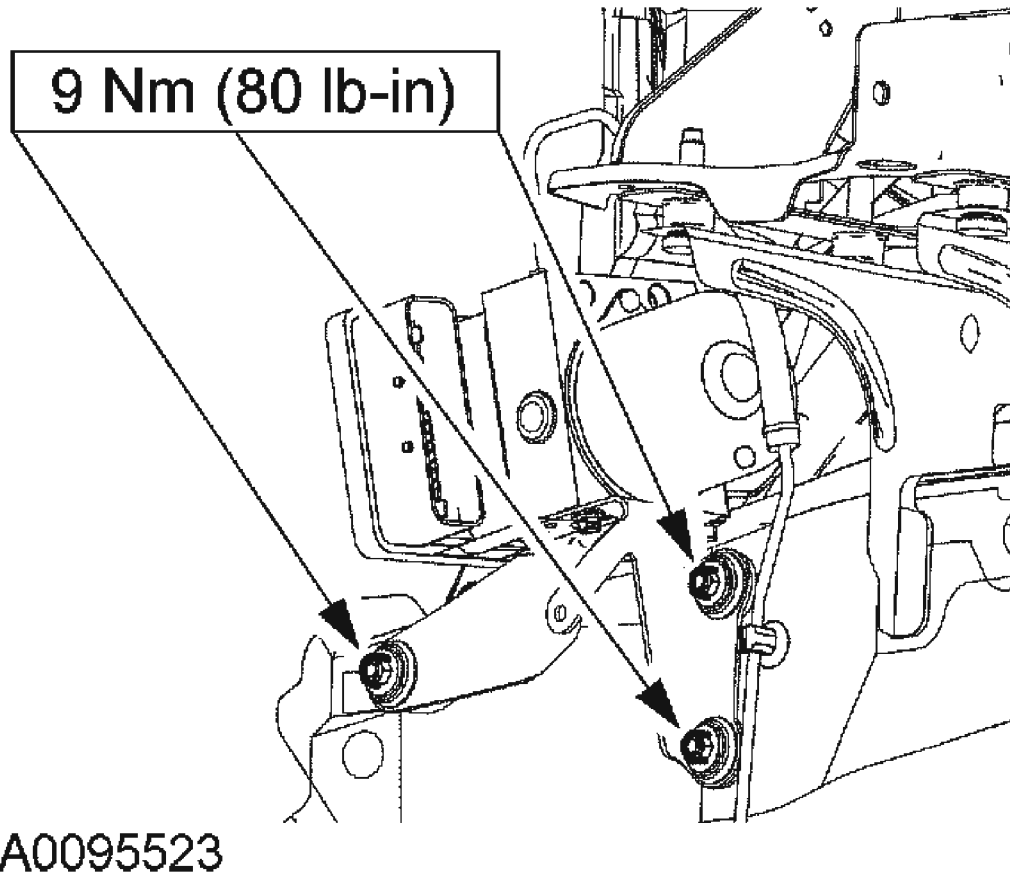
Removing HCU Support Bracket-To-Frame Bolts
